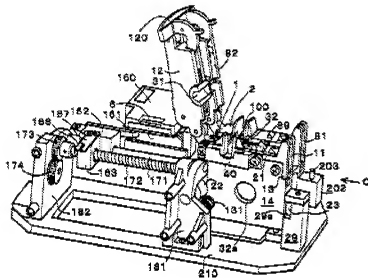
(Sano et al.) internal structure of the tube connection apparatus.
